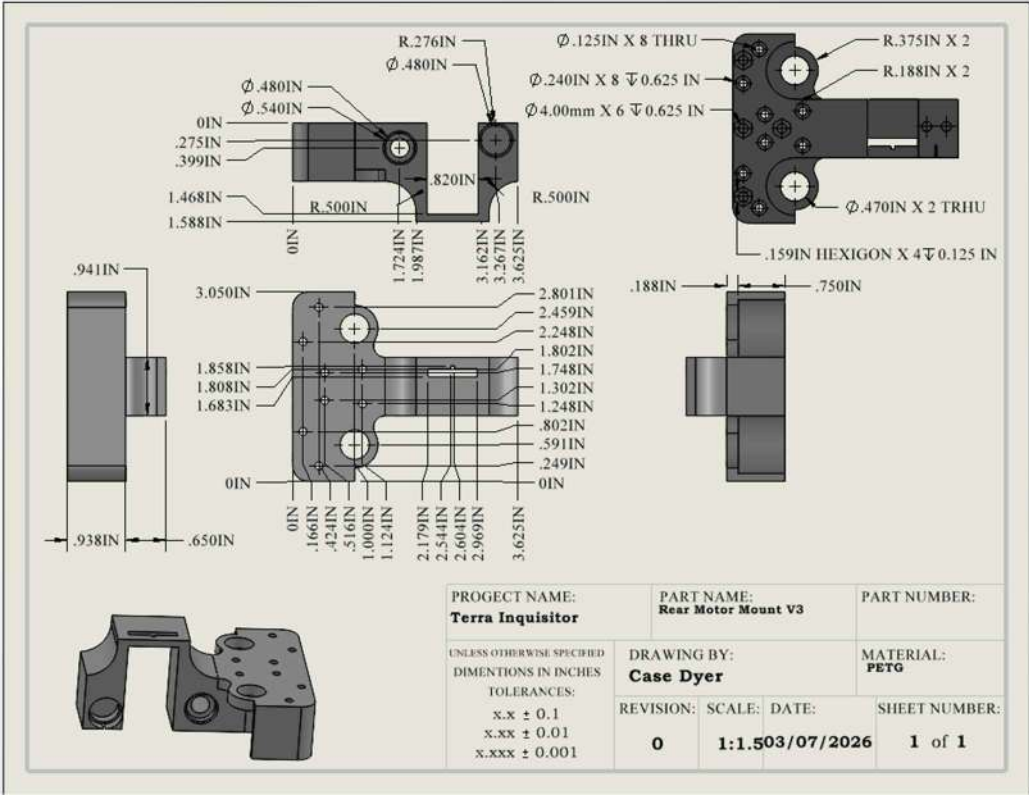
Track Drive Motor Mount Detailed Drawing
